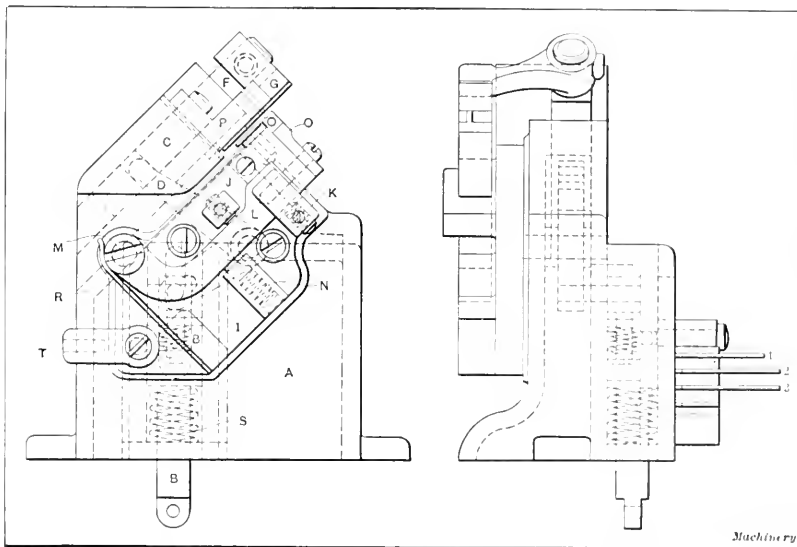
Machine for soldering Straps to Eye-pieces and Bridges
